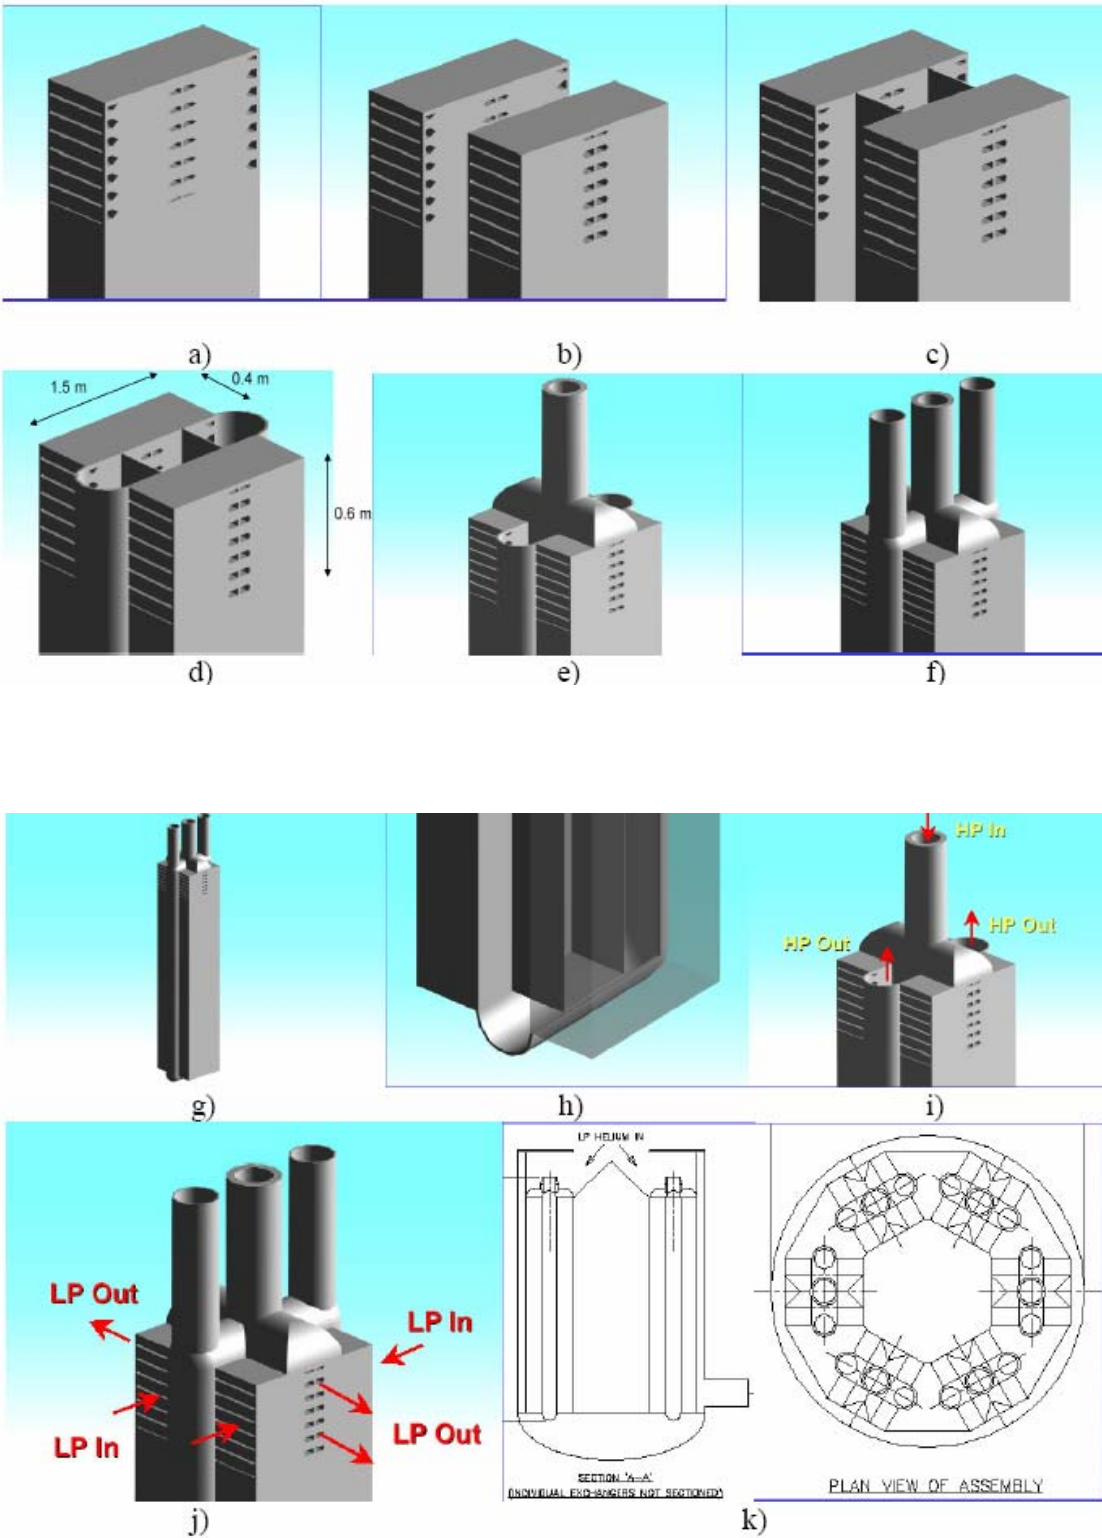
Stepwise assembly of multiported PCHE developed by Heatric™
